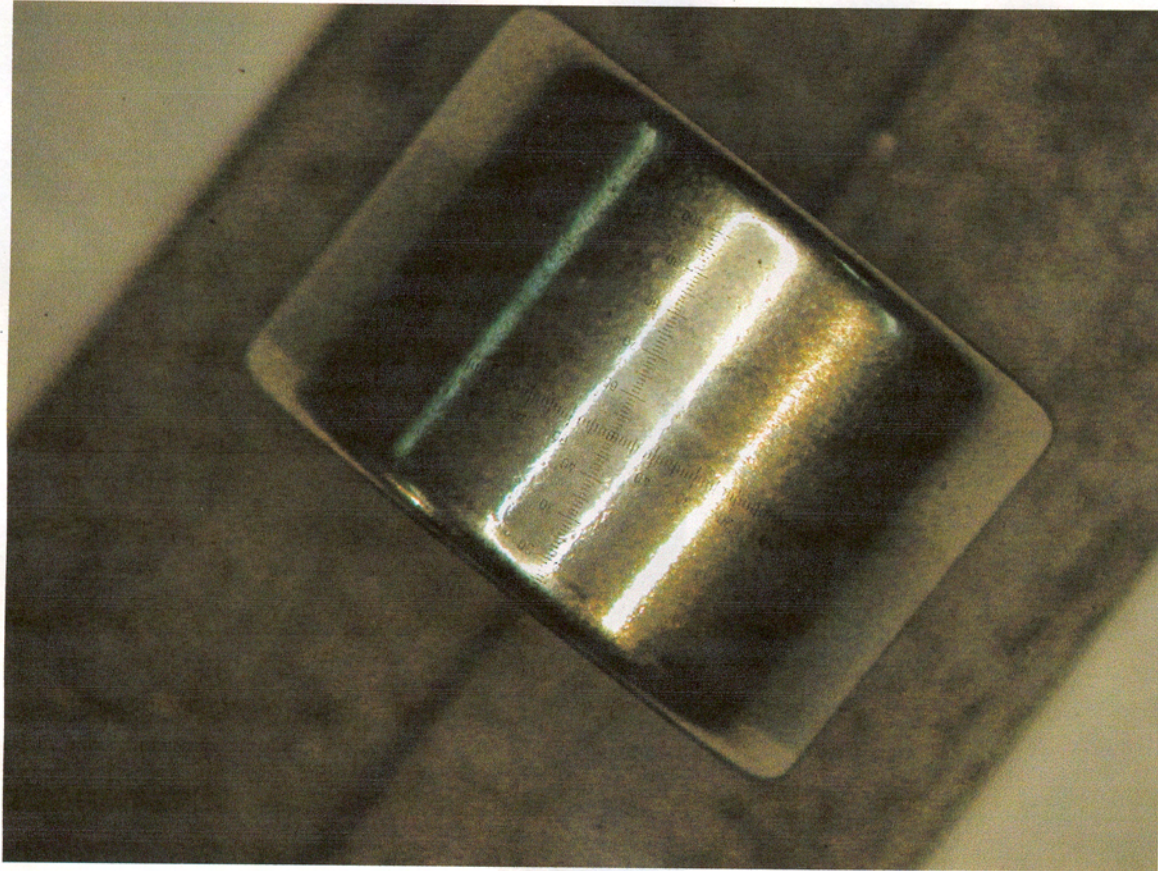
S01 is of the lower (load bearing) surface of the rocker shaft. It shows severe heat damage. Heat damage should not be seen on a rolling element bearing assembly as there is very little friction and the design requires almost no lubrication. Another concern is that there is considerable cold working of the steel for presumably a very low mileage part. One possible explanation for both conditions is that an uncontrolled valve train repeatedly gave an unusually heavy impact when the parts crashed together from either loft or surge. The heat was possible generated from plastic deformation of the shaft. The colors of the affected area show local temperatures of 500°F to 550°F which is extremely high. The heat was apparently generated here at the shaft rather than in the rocker because the rocker body showed no signs of being annealed which would have happened from this high of a temperature.
